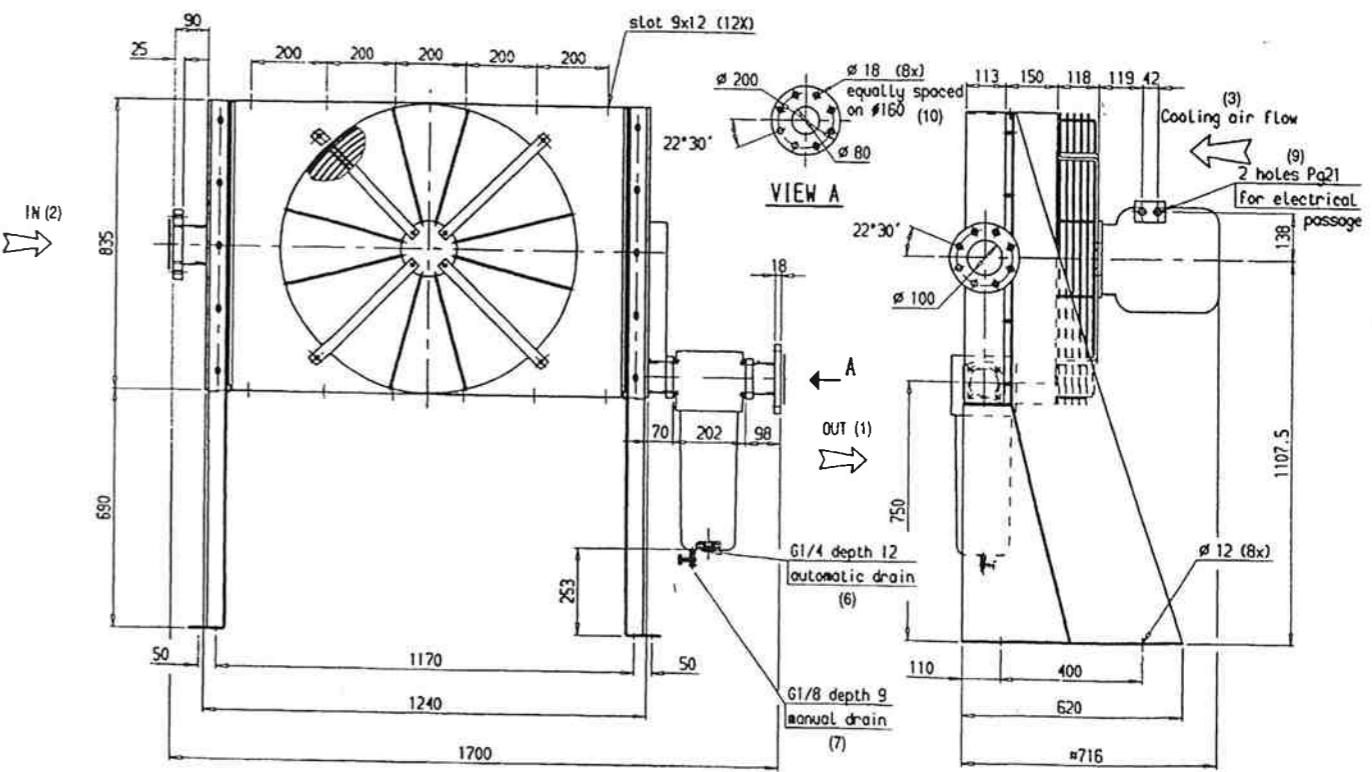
Dimension drawing/Dimensietekening/Dessin coté/Maßzeichnung/Dibujo de dimensiones/Dimensionsritning TD650 20 bar 130°C
